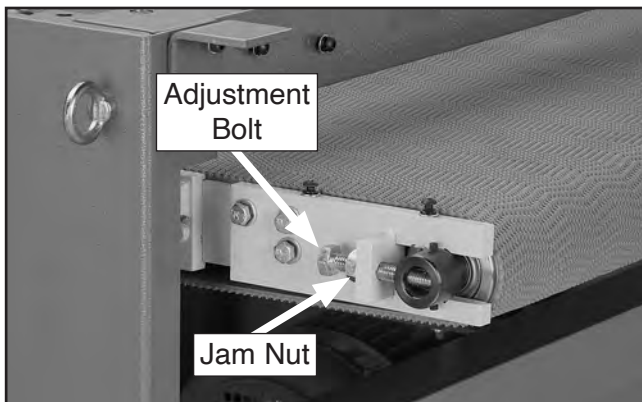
Conveyor tensioning & tracking controls (guard removed for clarity).
